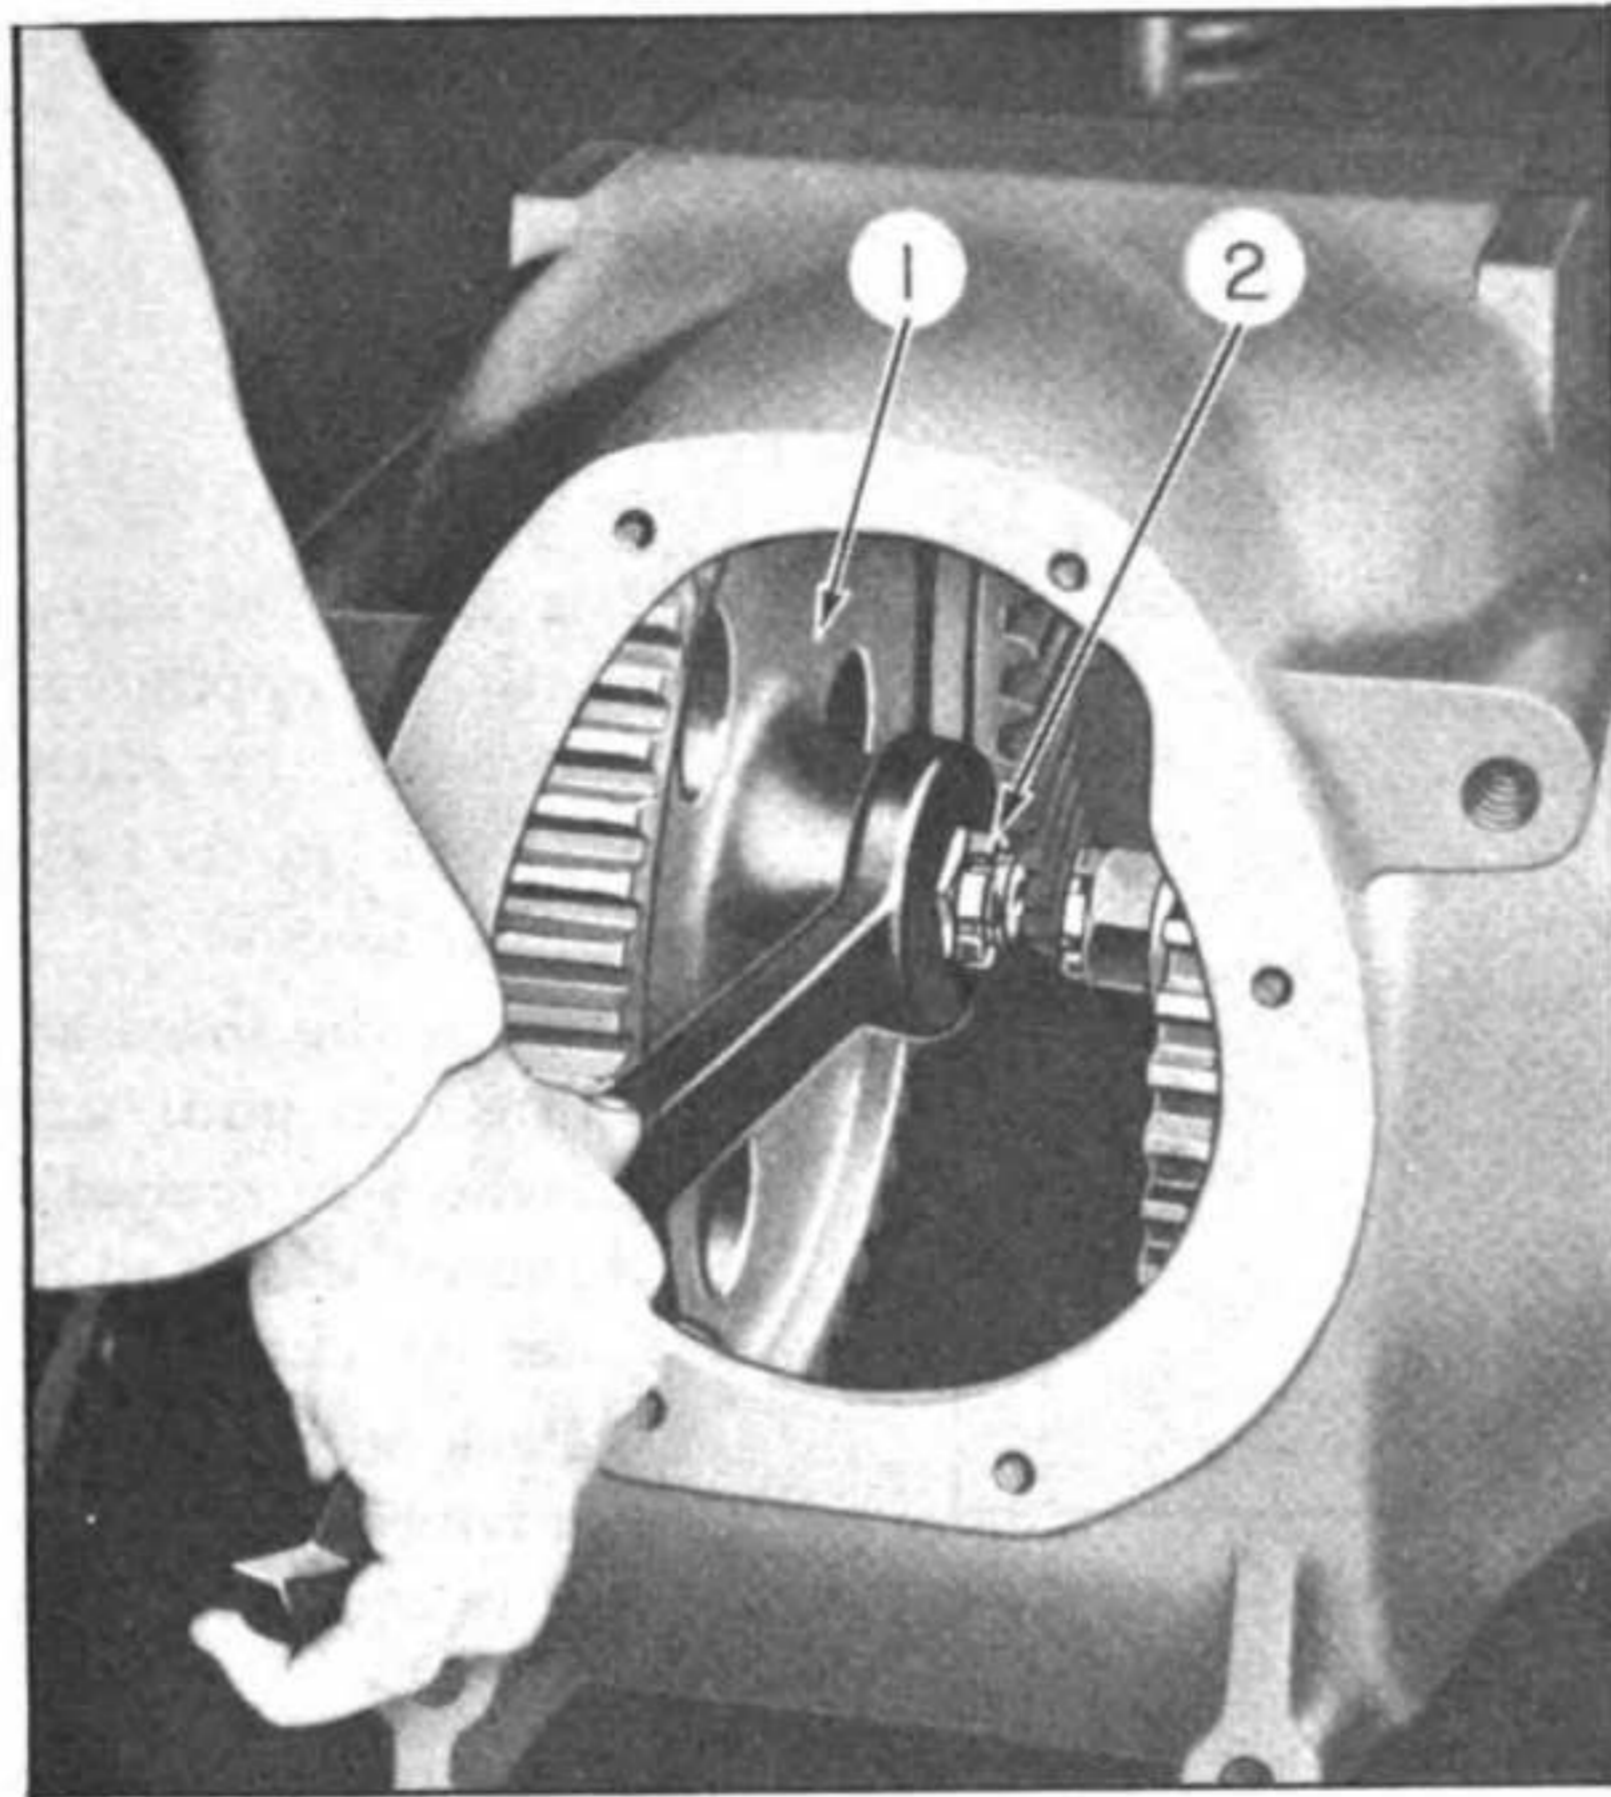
Adjusting Rear Axle Bearings by Tightening Nut on Inner End of Axle Shaft
